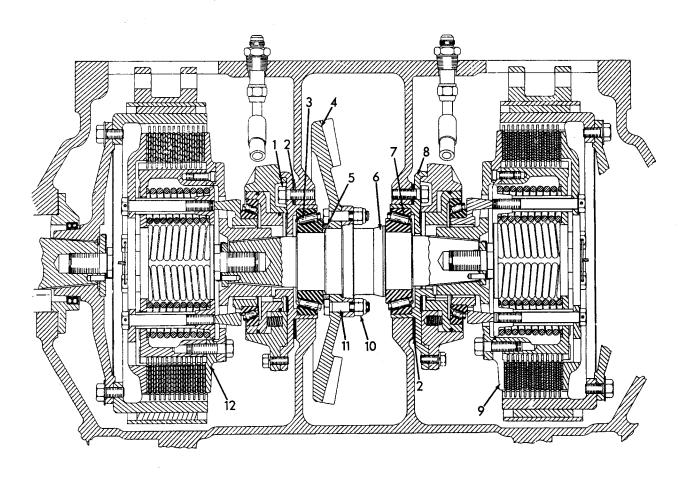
Bevel Gear and Shaft - Sectional View (T-71363)
